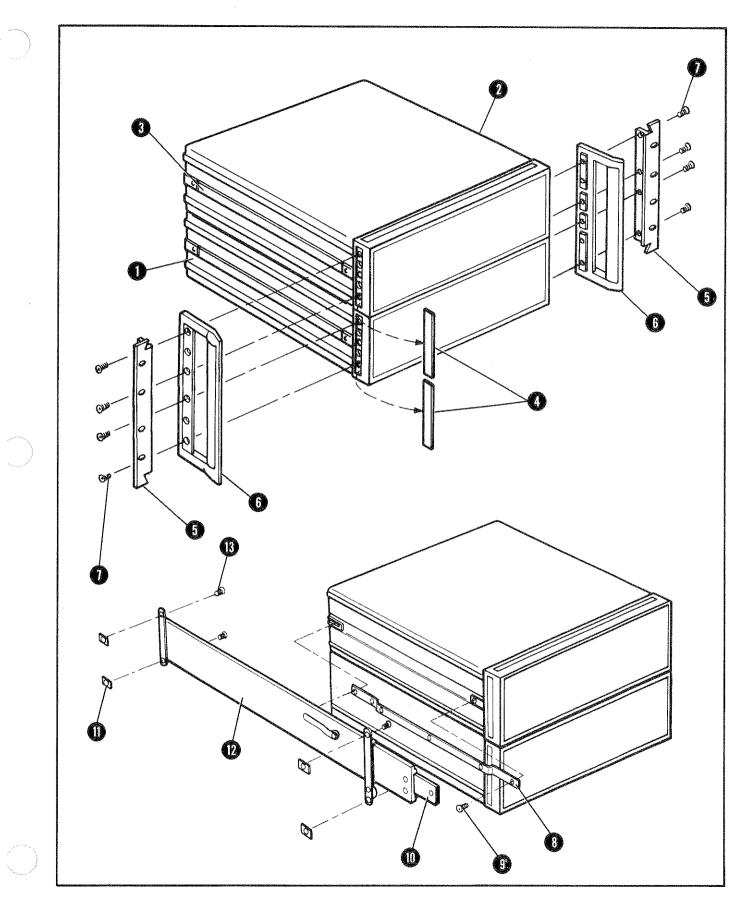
Attaching Slides with Rack Mount Flanges and Handles (1 of 2)
